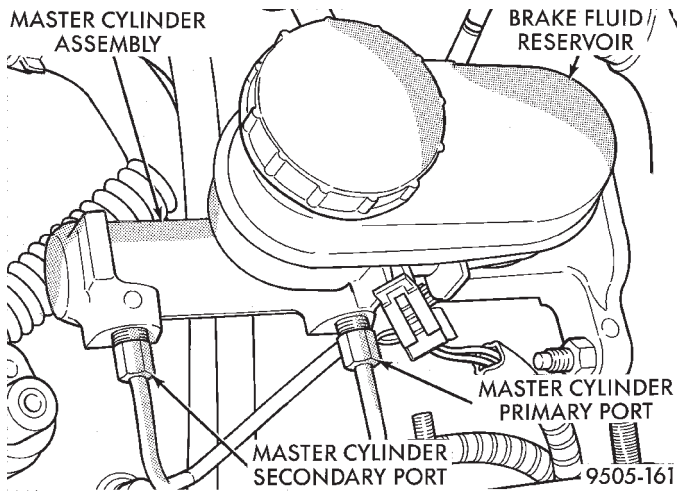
Master Cylinder Primary And Secondary Ports With ABS
